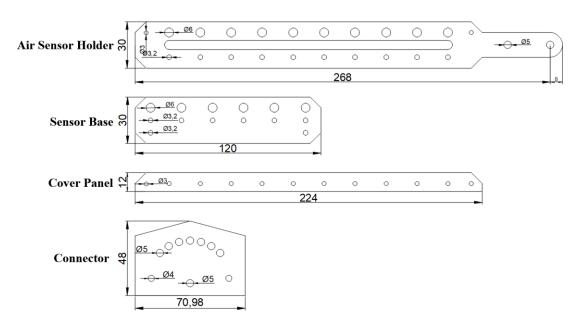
The CAD Drawing of Air Sensor Holder V1.0
